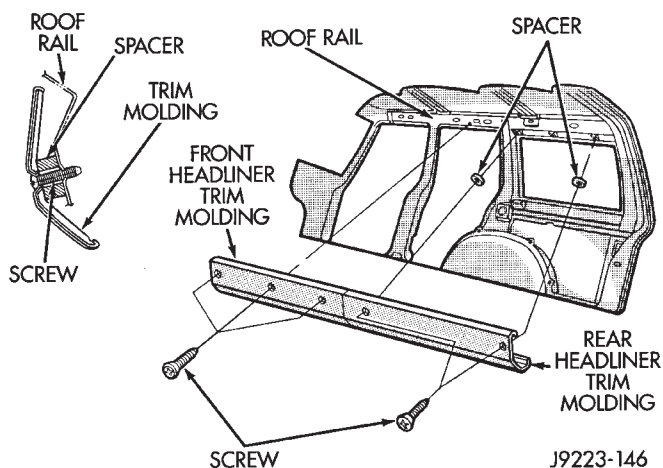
Upper Trim Molding—4-Door XJ Vehicles
